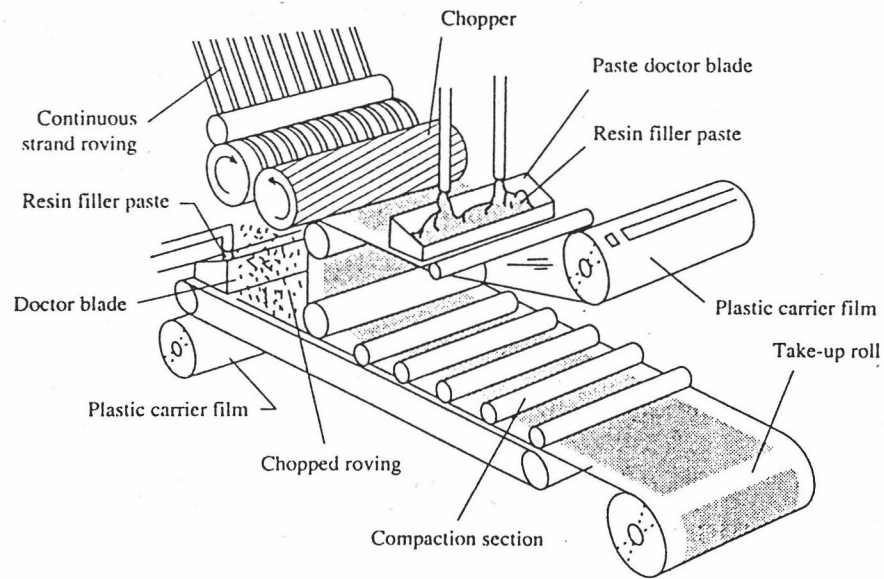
Machine for producing sheet-molding compound (SMC)[1].
